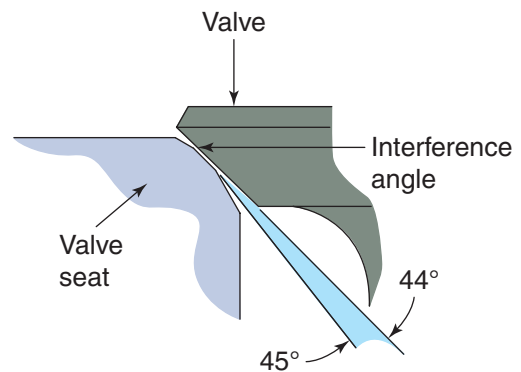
An interference fit is made when reconditioning valve seats to allow for better sealing of the valve and valve seat.
